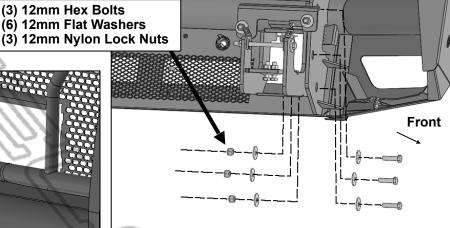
Attach the Plastic Cover assembly and the ACC assembly to the mounting plate on the back of the Bumper
